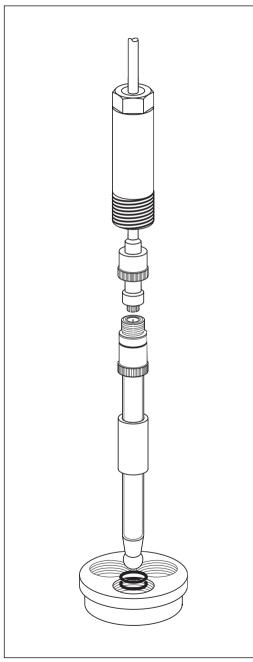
Standard mounting with mounting set FP20-R12(M), FP20-S12(M)
